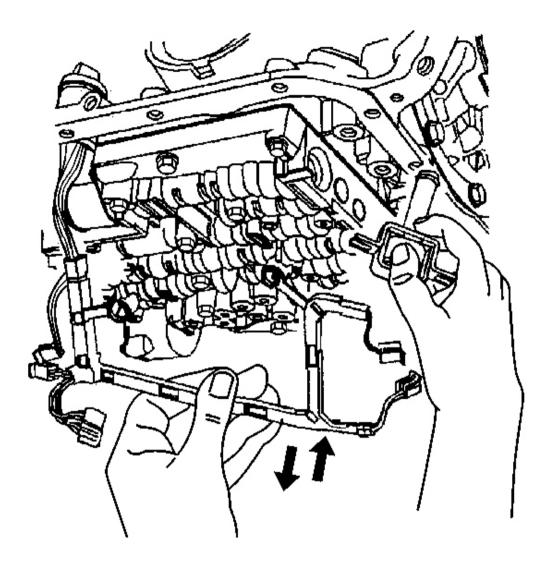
Identifying TCC Solenoid (With O-Ring Seal) And Wiring Harness Courtesy of GENERAL MOTORS CORP.
